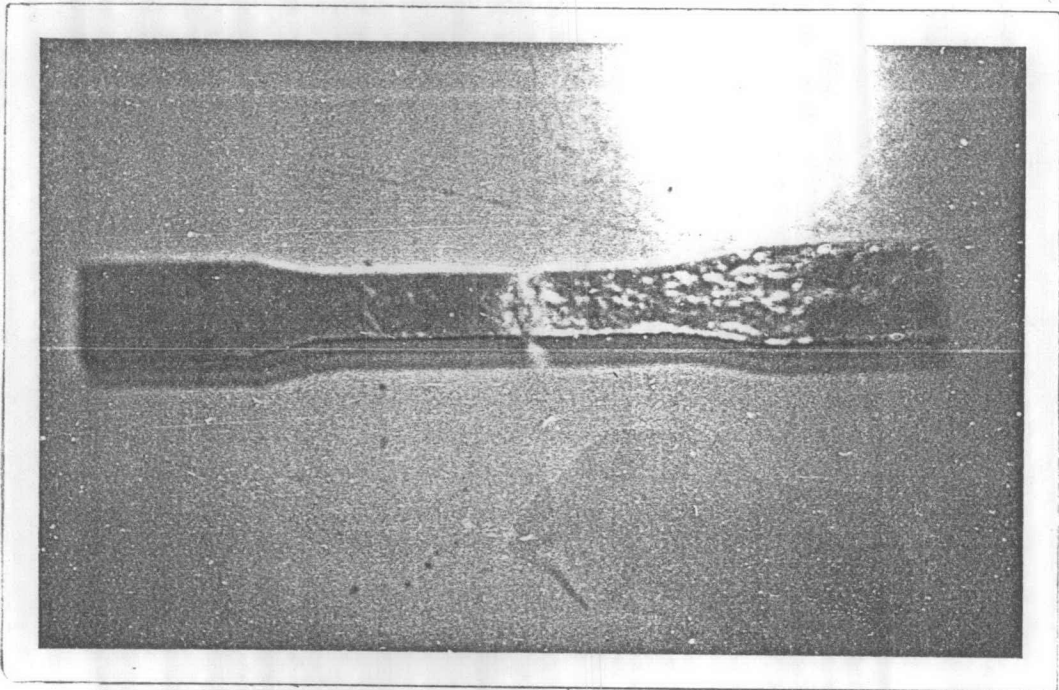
TEST SPECIMEN FOR GRP AFTER TENSILE TEST
